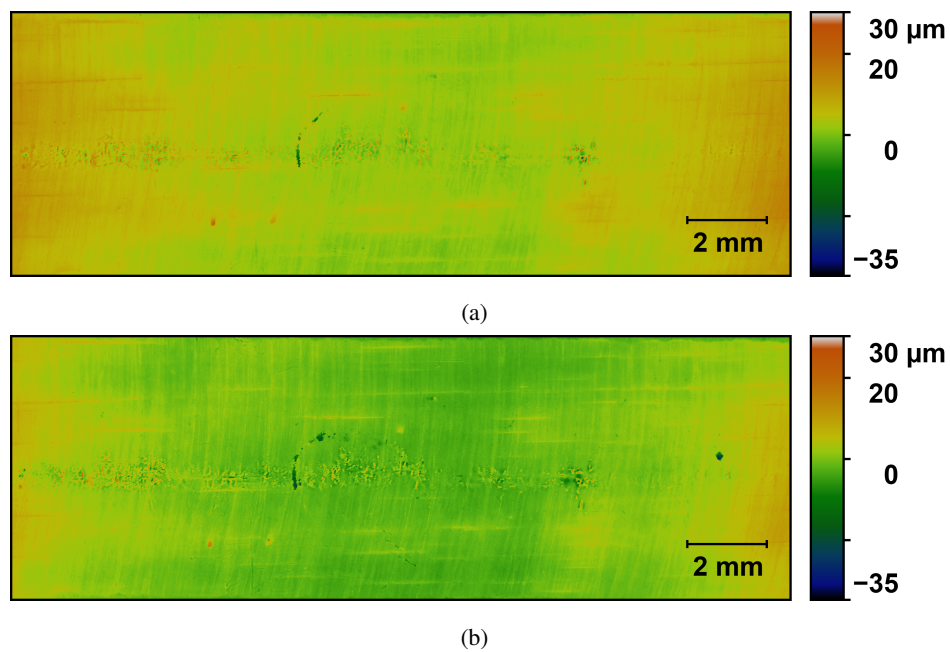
WLI surface maps of the (a) uncorroded and (b) corroded surfaces of the root of the 1.6 mm Alclad specimen. The top of these images is the RS, the bottom of these images is the AS, with the welding tool having travelled from left to right.
